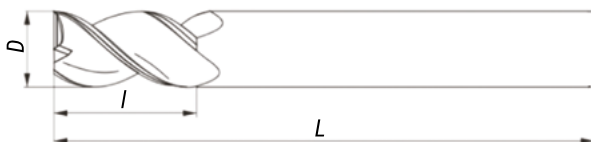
Drawing of SGS 44630 milling cutter used: D – working part diameter, L – overall length, l – maximum depth of cut [3]
